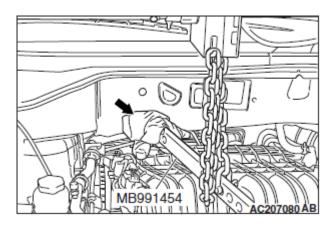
Placing Thick Shop Towel On Special Tool MB991454 Courtesy of MITSUBISHI MOTOR SALES OF AMERICA.
